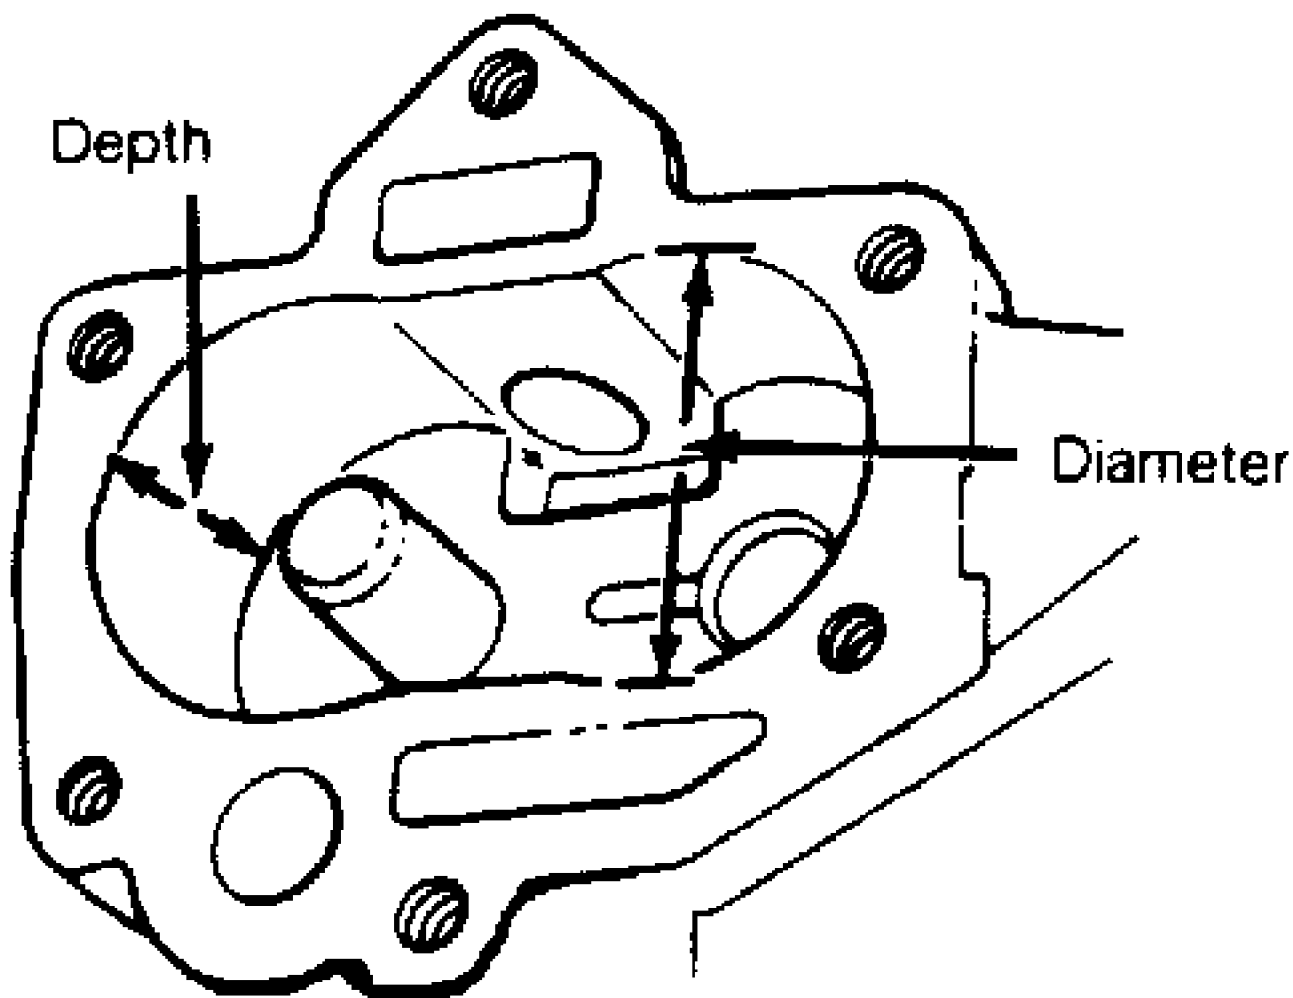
Measuring Oil Pump Gear Cavity - Typical
